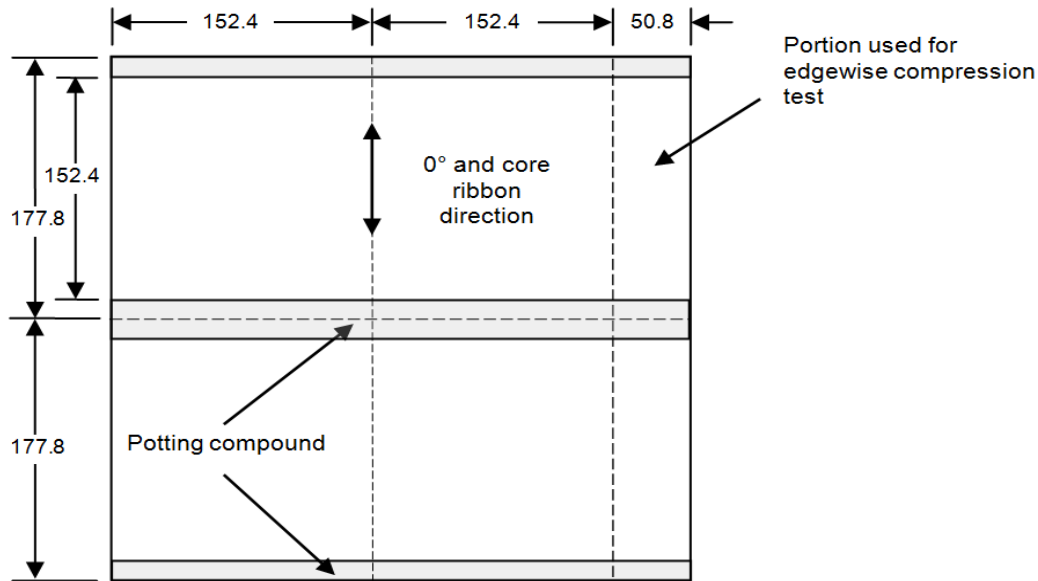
Typical panel dimensions after manufacturing and edge trimming (all dimensions in mm).
